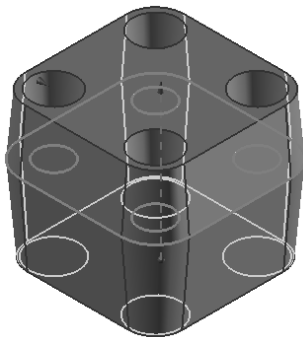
Preview of the tapered extrusion using the From Section option
